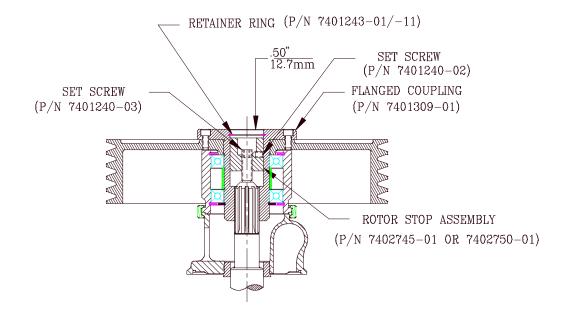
Readjusting Rotor Stop On A CONTHERM With An Electric Motor Drive (Belt & Sheave)
